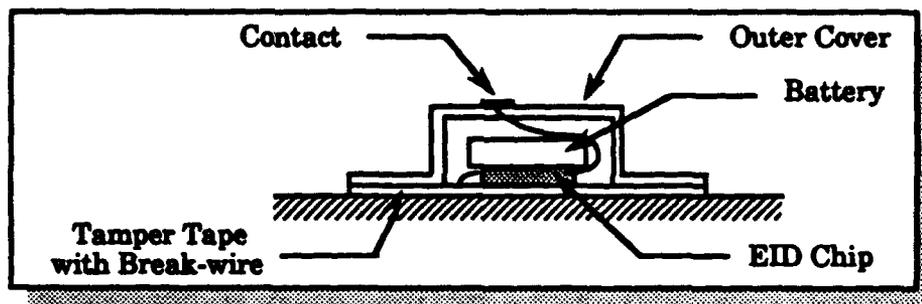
A contact EID with wiring in Tamper Tape. The wiring placed within the Tamper Tape gives added protection against intrusion or removal of the EID.
